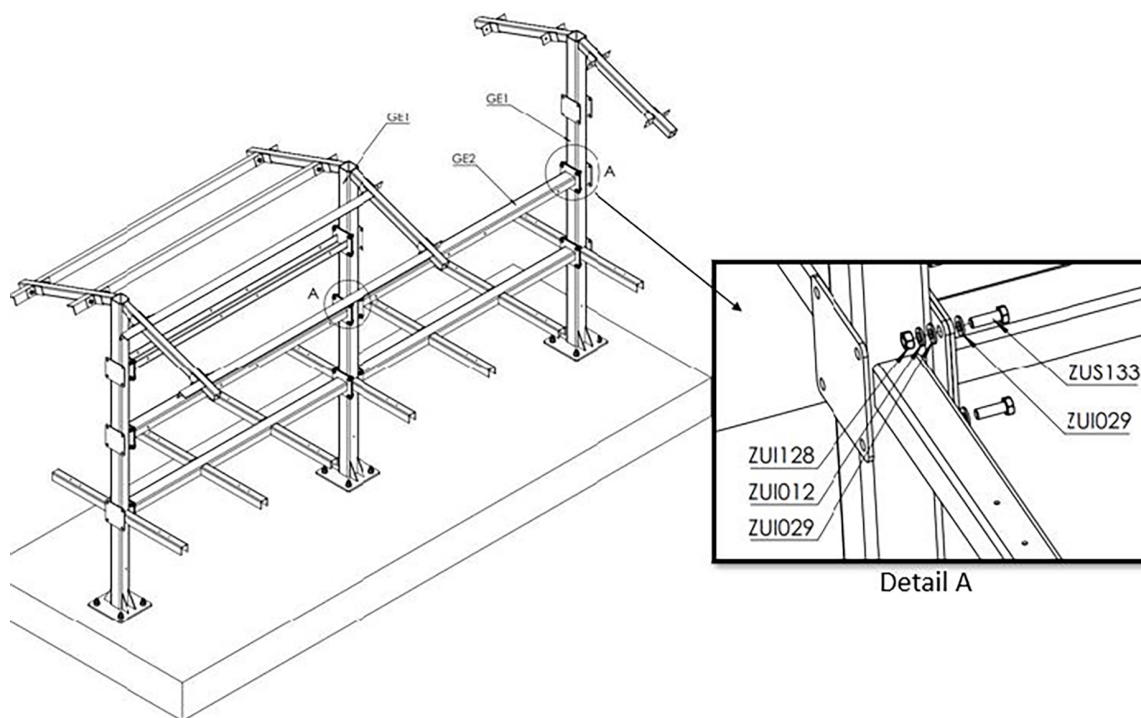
Assembly — Inverter rack — GE2-3, GE1 (detailed view)
